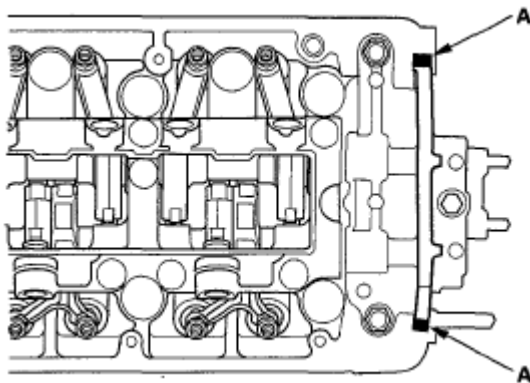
Identifying Rocker Shaft Holder Mating Areas
